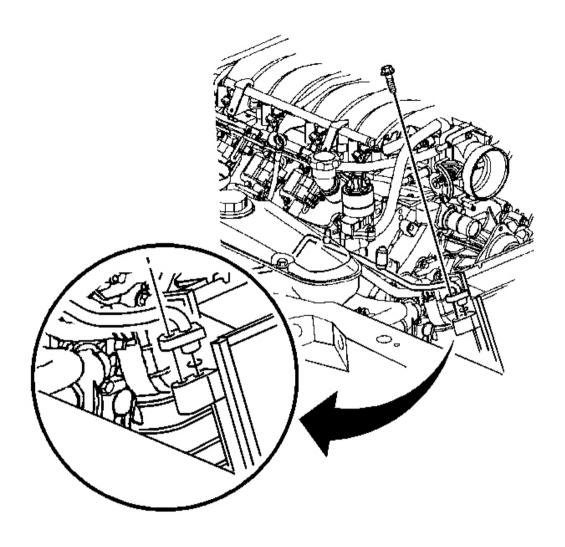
Front Evaporator Tube & Condenser Bolt Courtesy of GENERAL MOTORS CORP.
